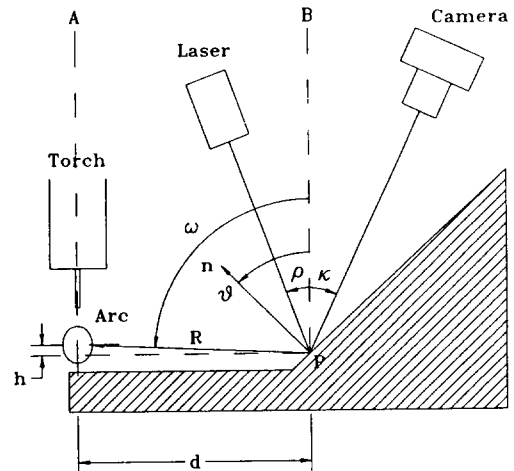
Diagram of typical welding vision system and weld arc
